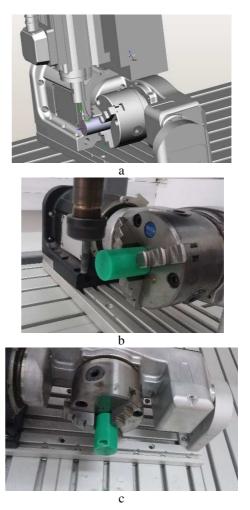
Cylindrical test part machining: *a* – simulation; *b* – machining; *c* – machining result.
